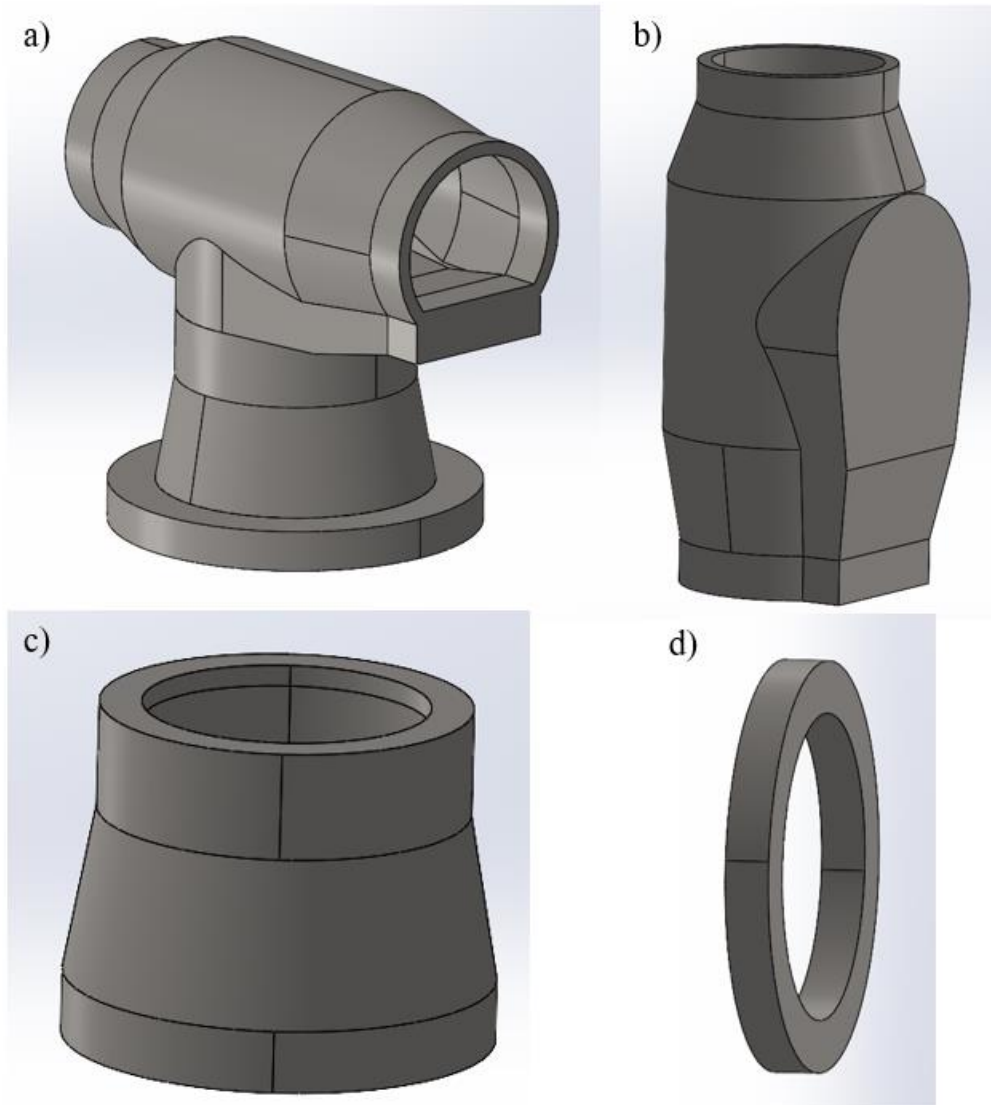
Completed CAD models for large-scale WA-DED 316L body, showing a) the entire valve body model, b) the top tube section, c) the base tube section, and d) the flange section.
